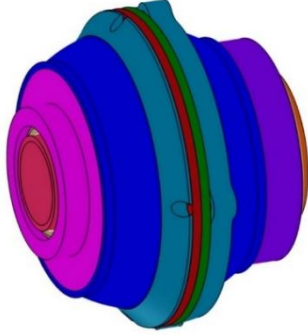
The new generation magnetic wobbling gear MS5G1R1 in frontal view
